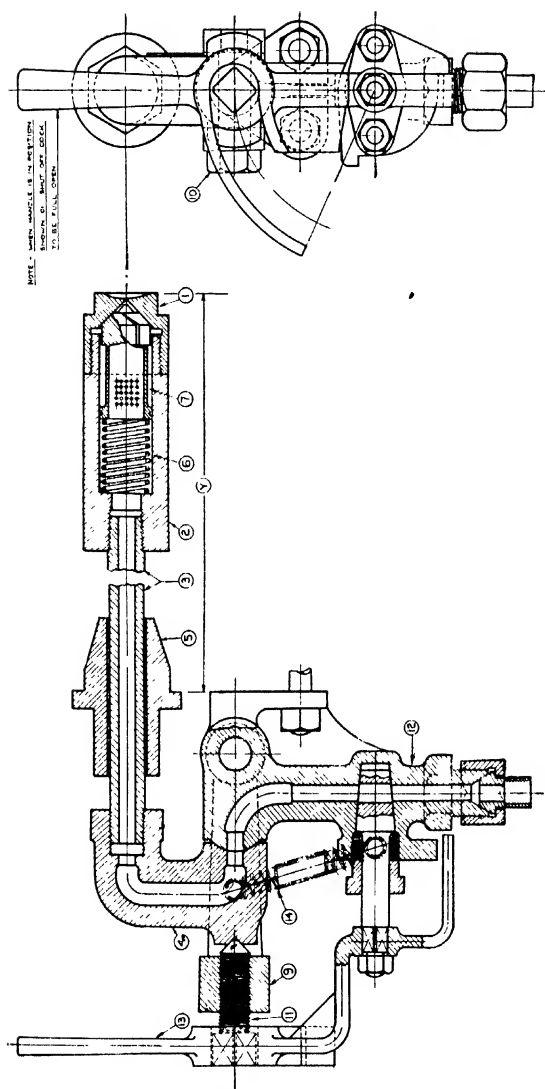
SECTIONAL VIEW OF TYPE "F" OIL BURNER WITH SAFETY SHUT-OFF COCK
